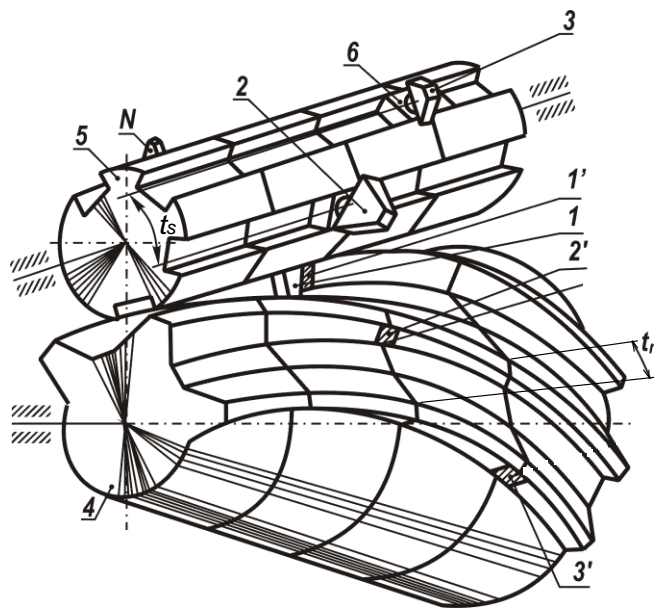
General schematics of double-link variator on the base of bevel gear with equidistant tooth lengthwise curves: 1, 2, 3, ... N – movable tooth of spur gear; 1', 2', 3' – applicable contact zones; 4 – bevel gear with constant normal pitch; 5 – spur compound gear; 6 – sliding elements jointed with tooth [31&21]
